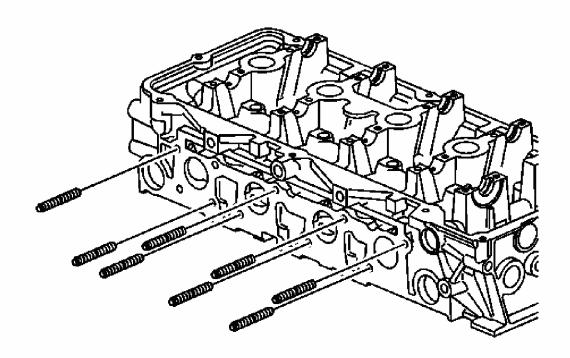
View of Exhaust Manifold Studs Courtesy of GENERAL MOTORS CORP.
